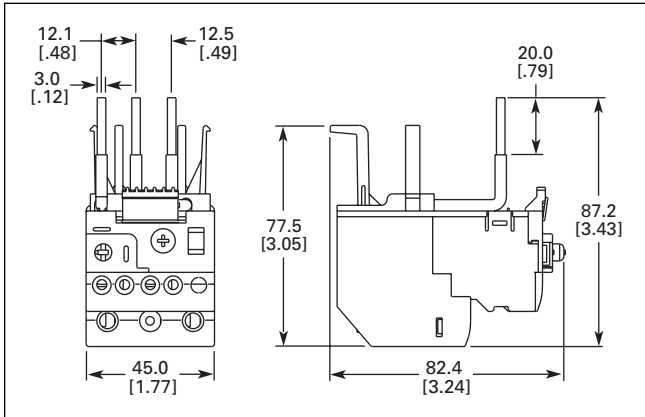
45 mm C396 (6.4 – 32A) Direct Connect to XT Frame C Contactor — Approximate Dimensions in mm [in]
